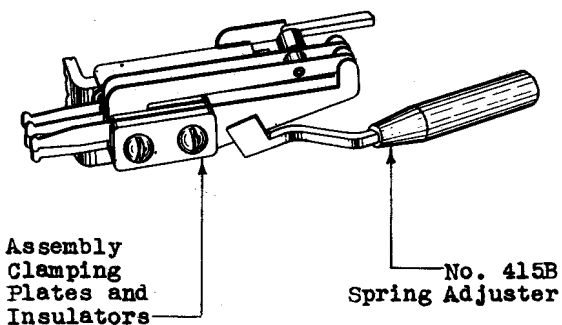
Adjusting Spring to Meet the Spring Gauging Requirements
